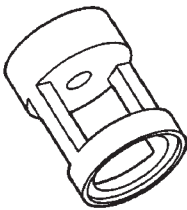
Valve Spring Compressor Adapter Tool 6716A
